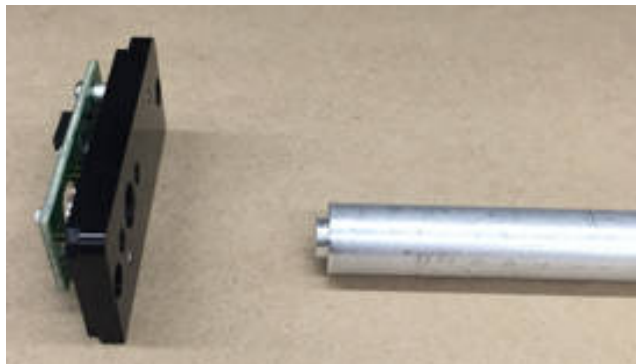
Proper justification of face plate and lens inserter to epoxy lens holder
